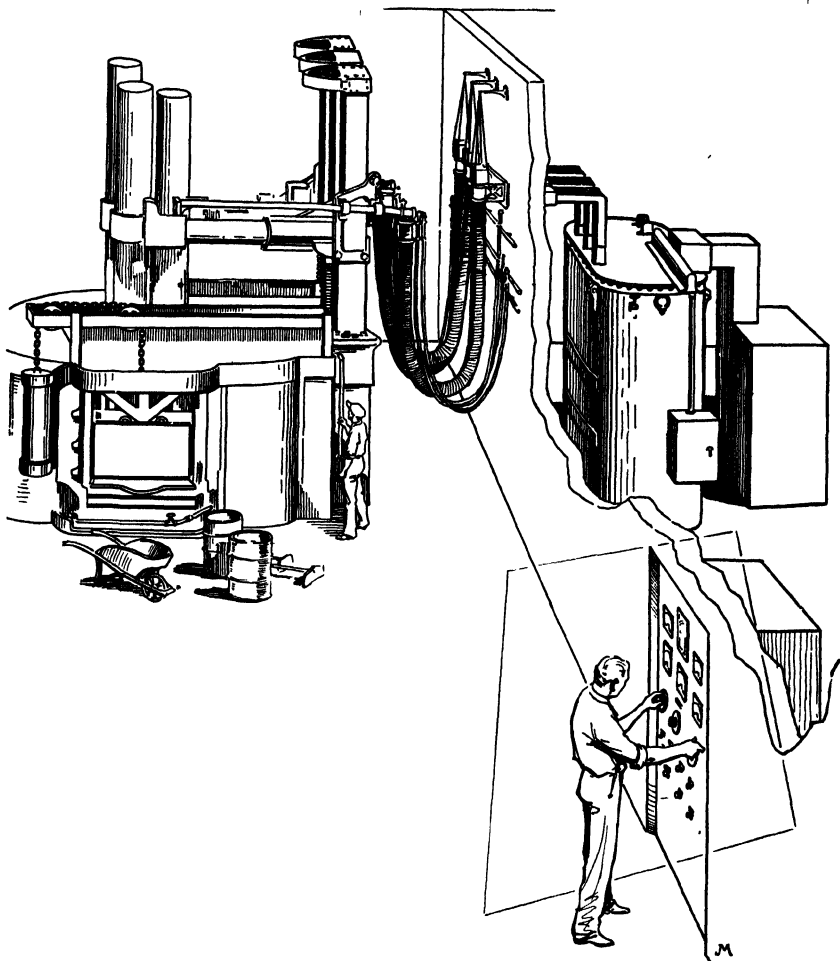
Typical Layout of Electric Equipment for Arc Furnace. Equipment includes furnace transformer, switch gear, and control.
